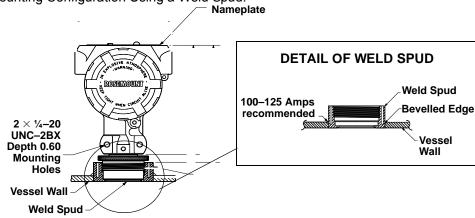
Rosemount 2090P Mounting Configuration Using a Weld Spud.
